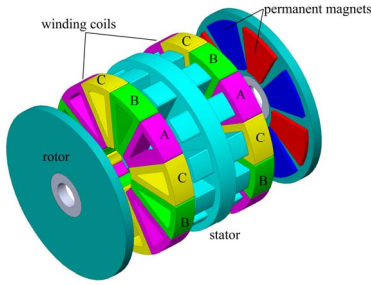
3-D view of a four-pole-pair/12-slot SSDR AFPM machine.
